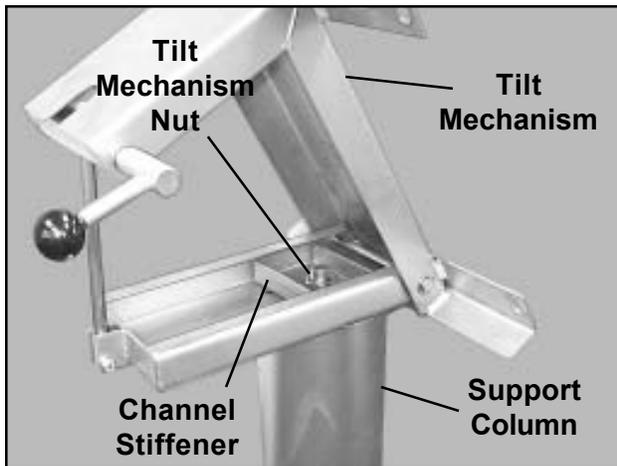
Mounting Screws/Nuts/Washers - Table Top to Base
